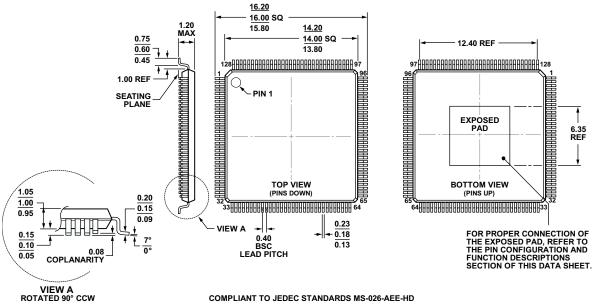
128-Lead Thin Quad Flat Package, Exposed Pad [TQFP_EP] (SV-128-1) Dimensions shown in millimeters
